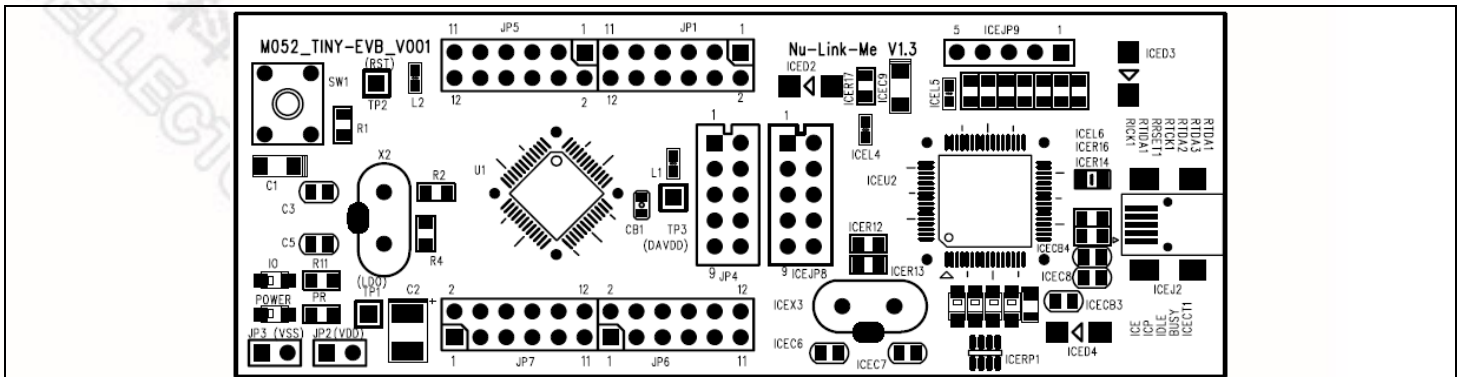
NuTiny-SDK-M051 PCB Placement
